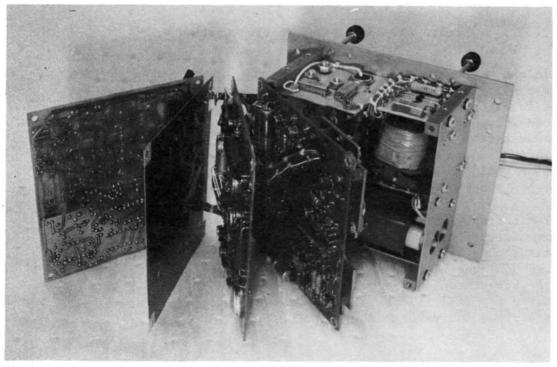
Solid-State Circuit Breaker, Open Assembly
